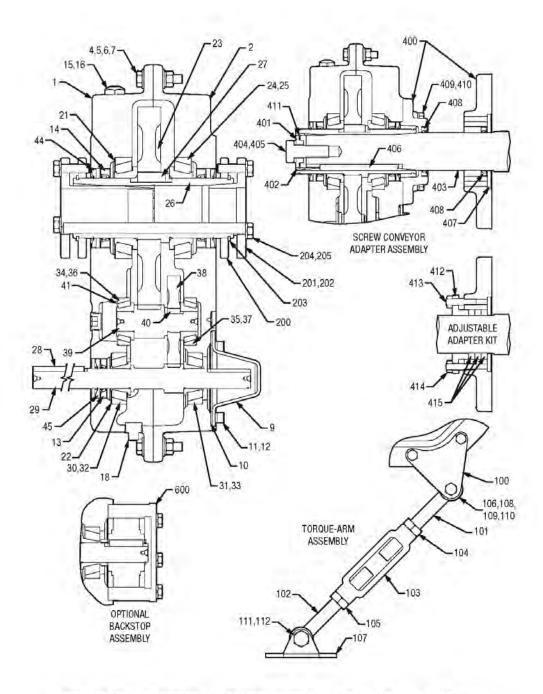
Parts for TA0107L thru TA12608H Taper Bushed Double Reduction Reducers
